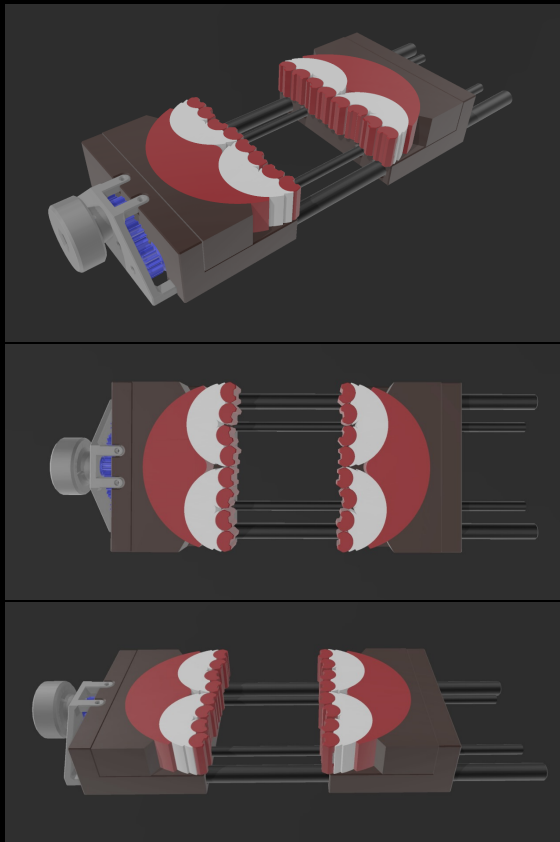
Top: Isometric view of the complete vise assembly. Middle: Top view of the vise assembly. Bottom: Top-lateral view of the complete vise assembly.
